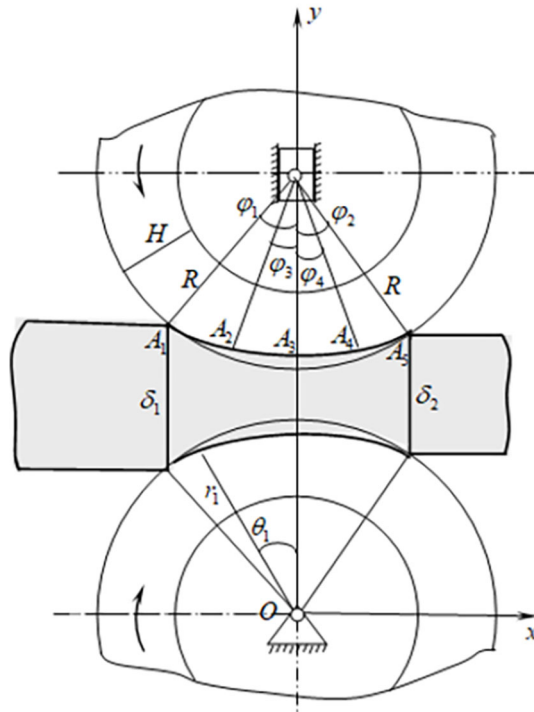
Scheme of a two-roll module of a squeezing machine.
